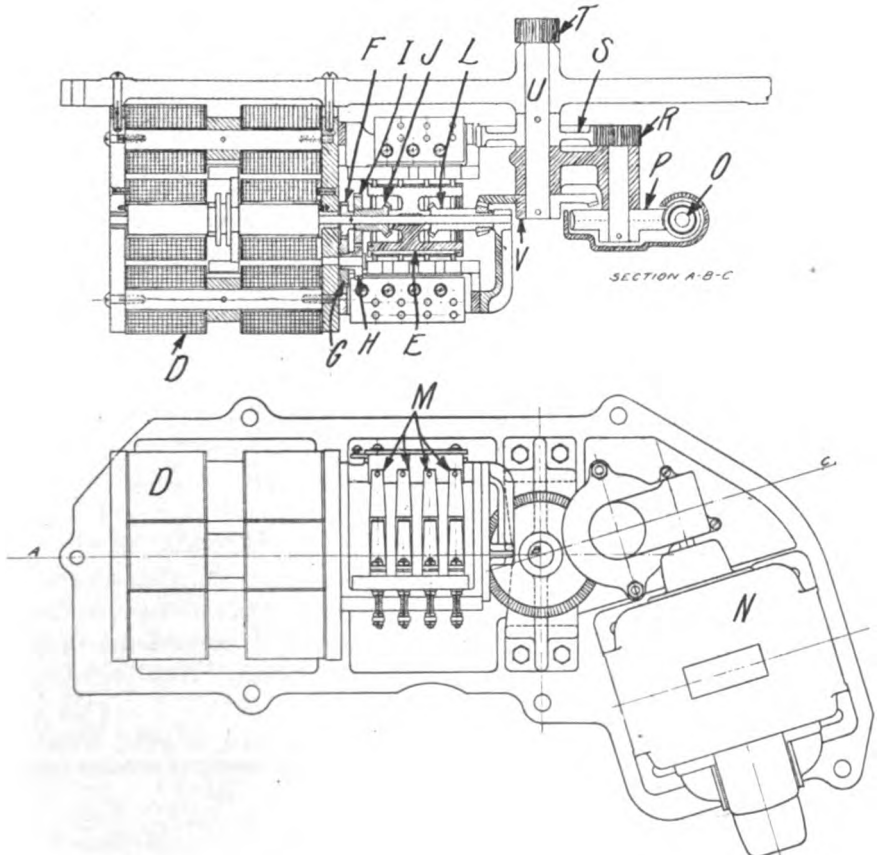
Assembly of Horizontal Training Mechanism of 36" E. C. Projector.
